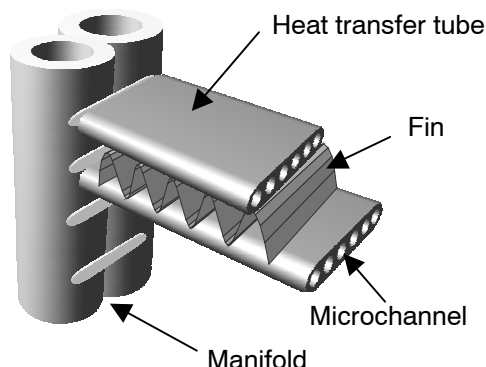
Principles of CO₂ heat exchanger geometry using “multi-port” extruded tubes with microchannels, folded fins, and a compact “double barrel” manifold [1]. The heat exchanger is assembled by brazing in a furnace
